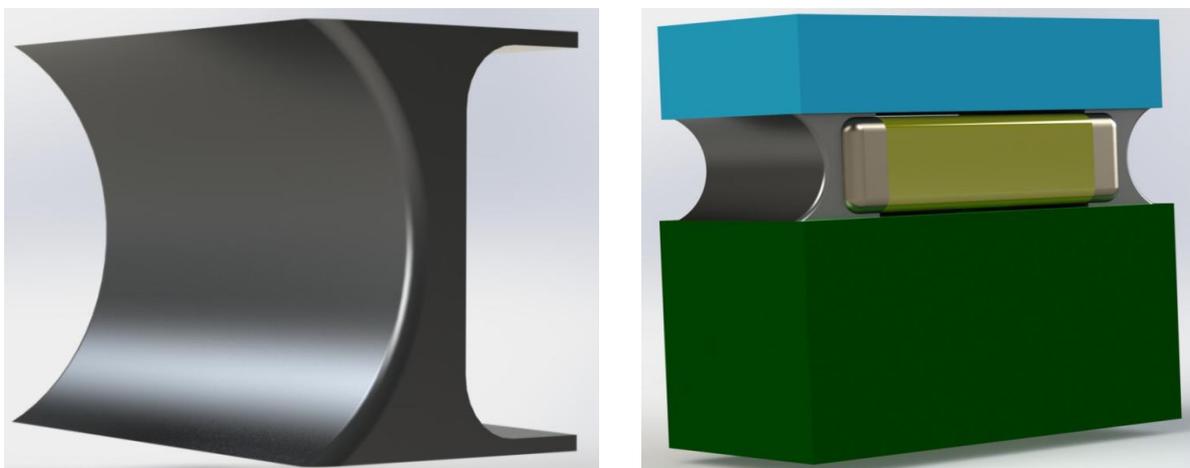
Models from Solidworks (a) Solder joint (b) Assembly FR-4-LTCC
